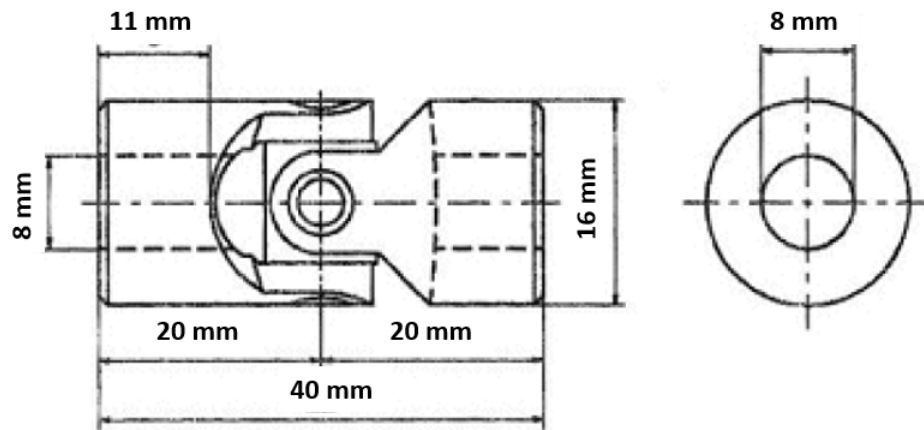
The technical drawing of the RS Pro universal joints. The dimensions given are in mm. - Modified from RS-Components (2017).
